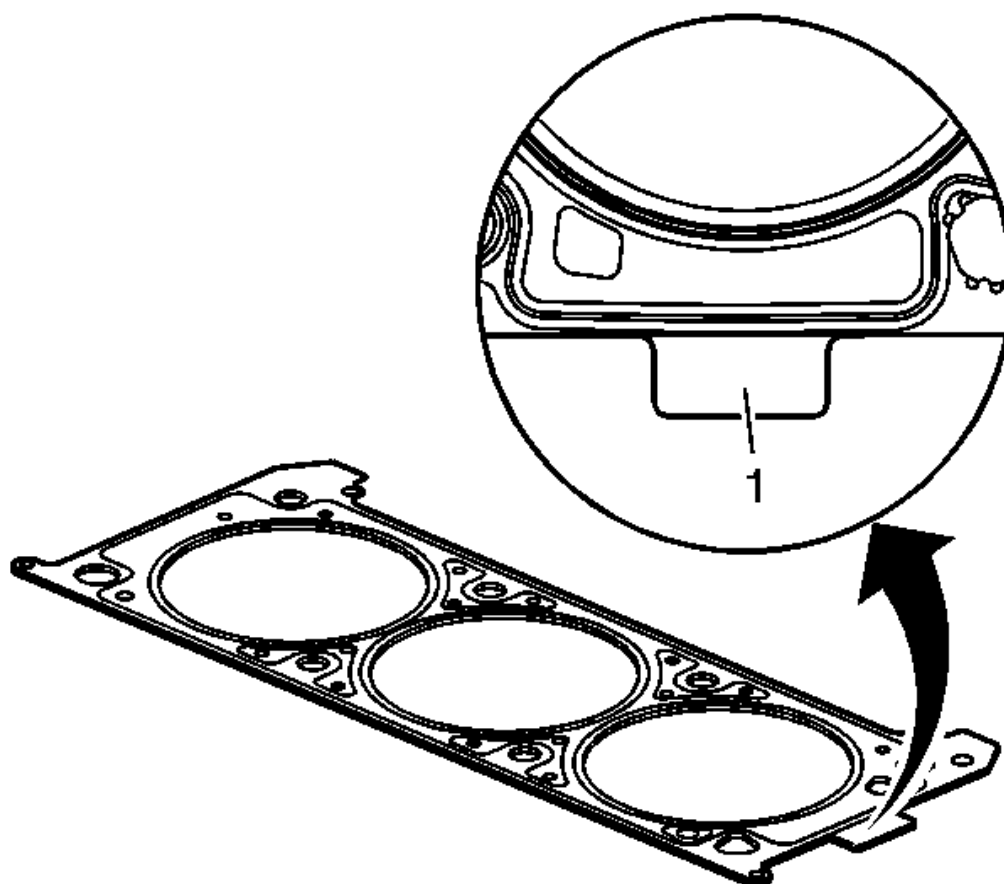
Identifying Proper Cylinder Head Gasket Installation
